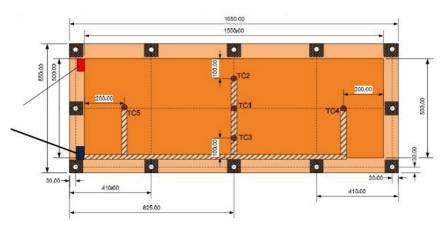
Conductive heating and vacuum blanket with dimensions and thermocouple positioning
